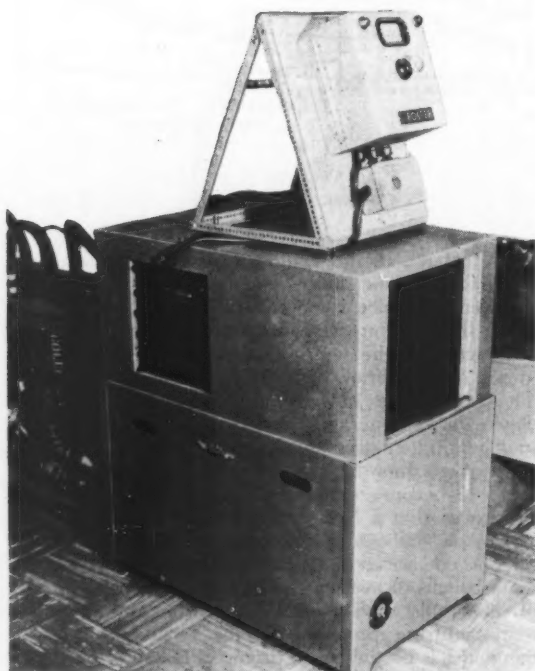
Refrigerator unit with automatic controller used to control temperature of coolant on cylindrical grinding machine.
